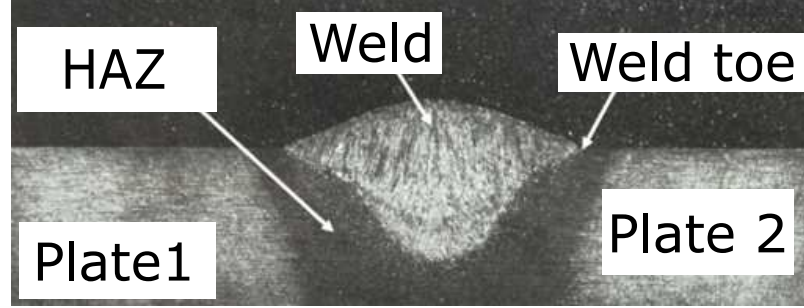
Cross section of a weld showing the Heat Affected Zone (HAZ) [13]
